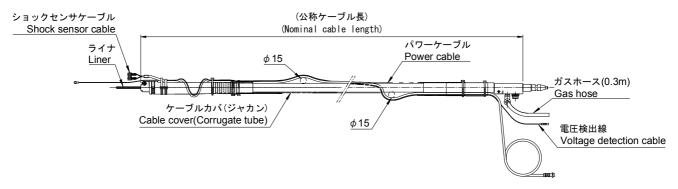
Outline drawing of the coaxial power cable (For NB4/NB4S/NB4L/NB4LS manipulator (with voltage detection cable)
